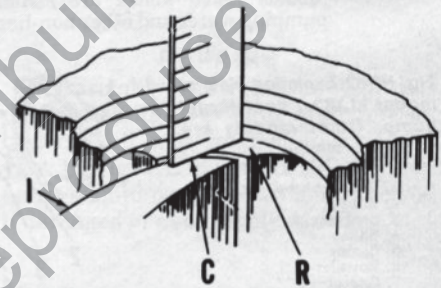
Gap (C) between impeller (I) and wear plate recess (R) in impeller housing of models 123TP4 and 160TP4-1 should be 0.005-0.015 inch. Refer to text.
